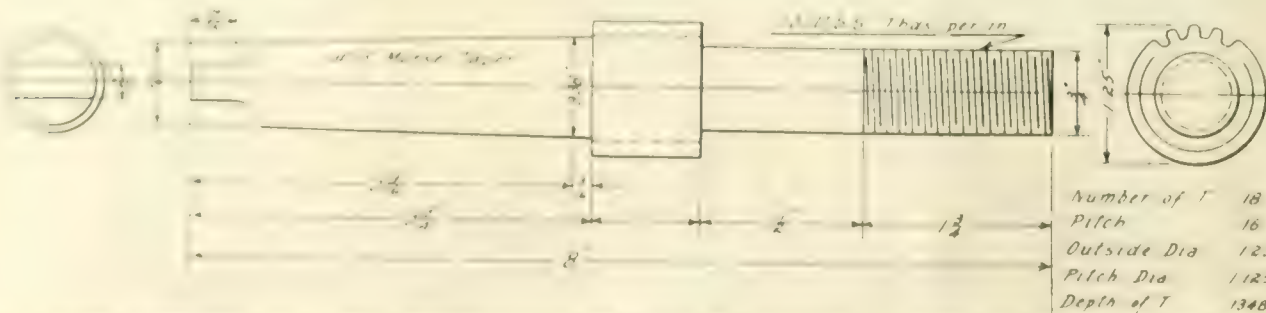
STUDENT MAKE THE PIECE TO CONFORM
